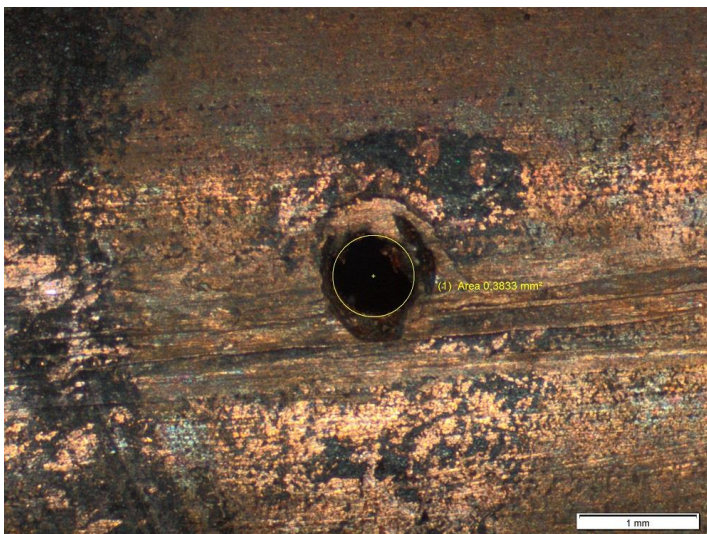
Detail of a leak hole. Macro photo with size indication (1 mm).
